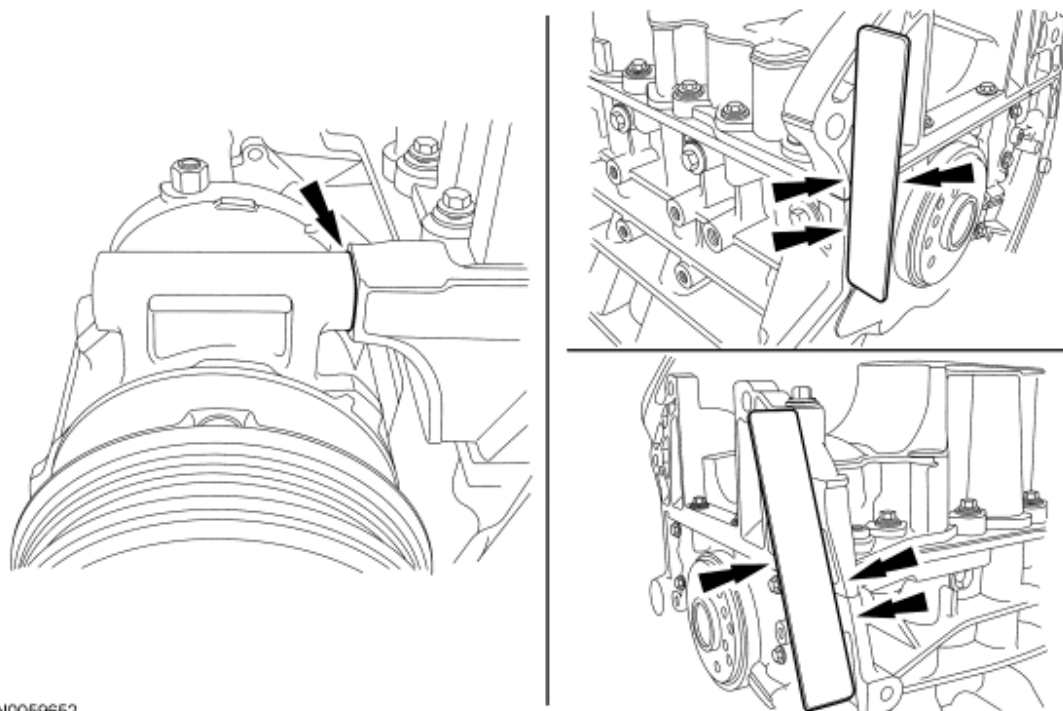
Aligning Oil Pan Flush With Rear Of Cylinder Block
